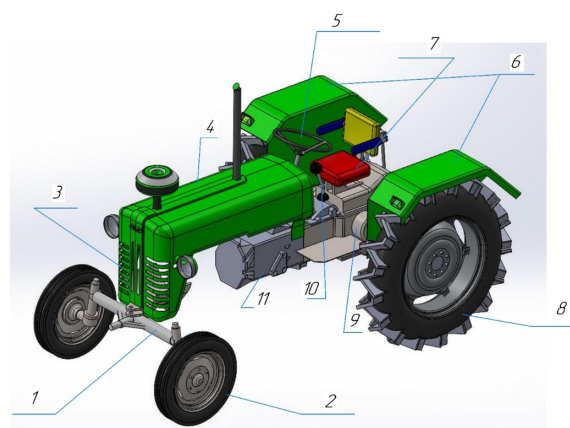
Digital prototype of a tractor, which was modeled on SolidWorks 2021 SP01 1-front axle; 2-front wheel; 3-front grill; 4-bonnet; 5-steering wheel; 6- back wheels cover; 7-seat; 8-back wheel; 9-back axle; 10-transmission; 11-clutch box.
